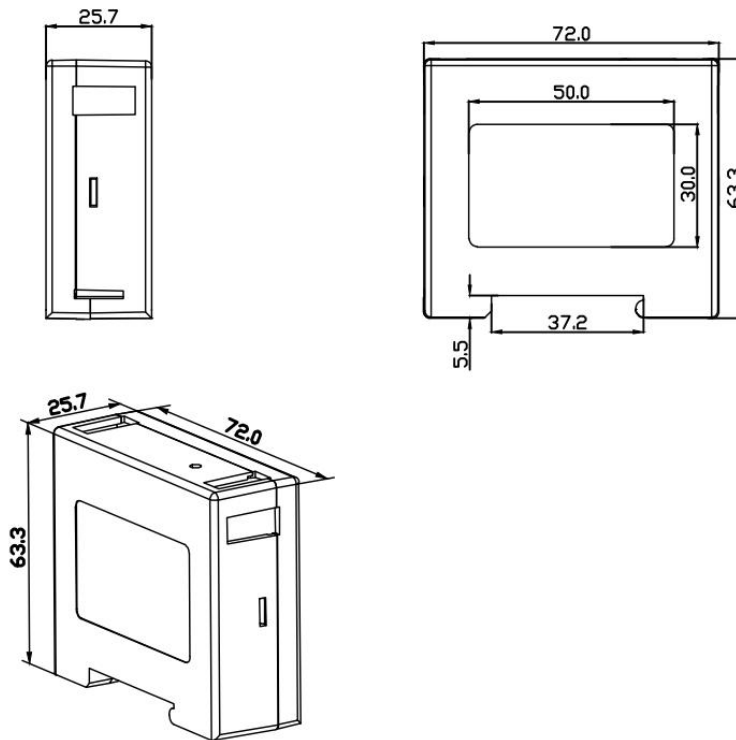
Dimensions of KDYA-DG1502-12K switching power supply
